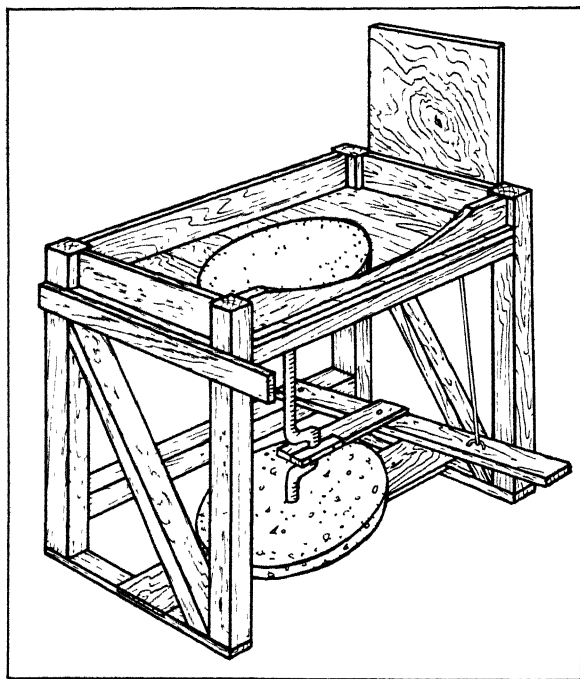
This crank-propelled wheel can be built for a small sum, and can be made to be kicked with either the right or the left foot. See Fig. 148 for dimensions.
